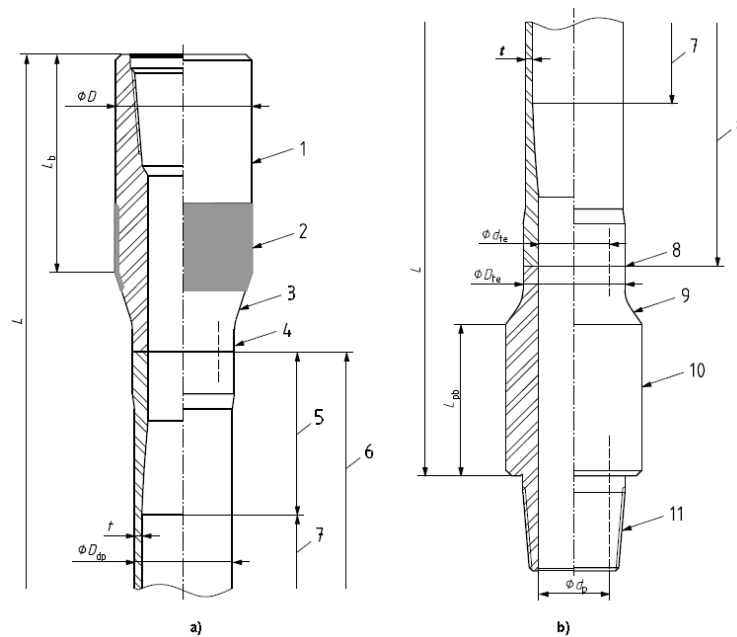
Drill pipe. 1 – tool-joint box; 2 - wear-resistant coating (optional); 3 - shoulder for the elevator; 4 - weld of the coupling; 5 - planted end; 6 - pipe body; 7 - pipe body; 8 - pin weld; 9 - pin socket; 10 – tool-joint pin; 11 - rotary shouldered connection.
